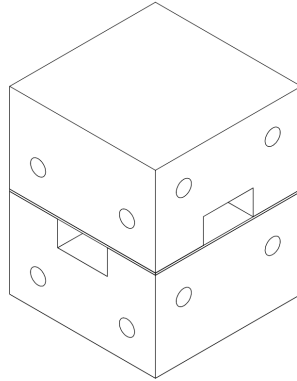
EVLA cross-guide "Cal Coupler" assembly
